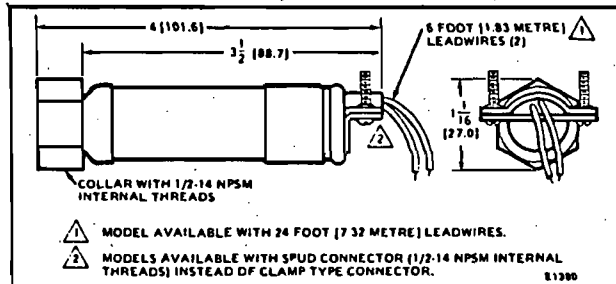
INSTALLATION DIMENSIONS OF THE C7027A, IN in. [mm IN BRACKETS].
